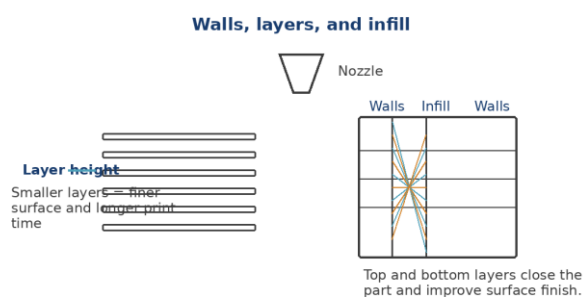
Shell settings control how the outside of the part is built and how solid top surfaces become.
